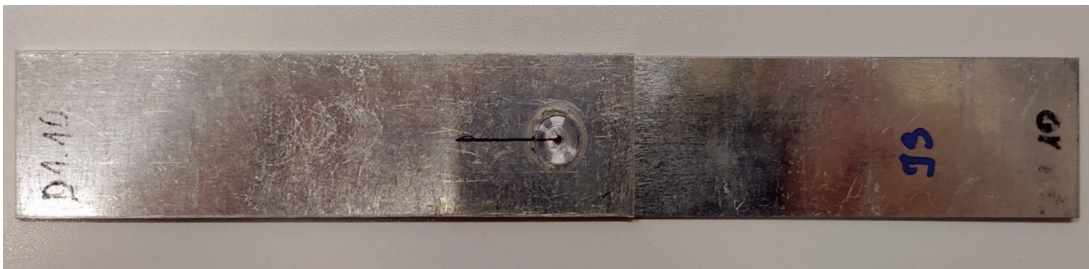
Specimen I3 representing the *initial state* after the RFSSW process with following parameters: spindle speed – 2800 rpm, tool plunge depth – 1.5 mm, duration of welding – 1.5 s.
